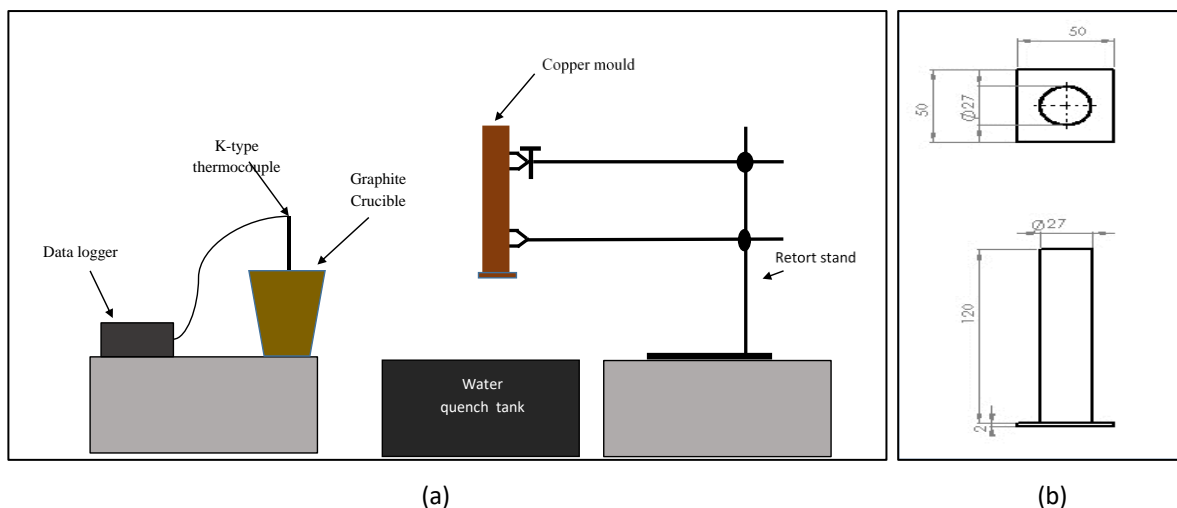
Experimental setup (a) DTM (b) Copper mould dimension
